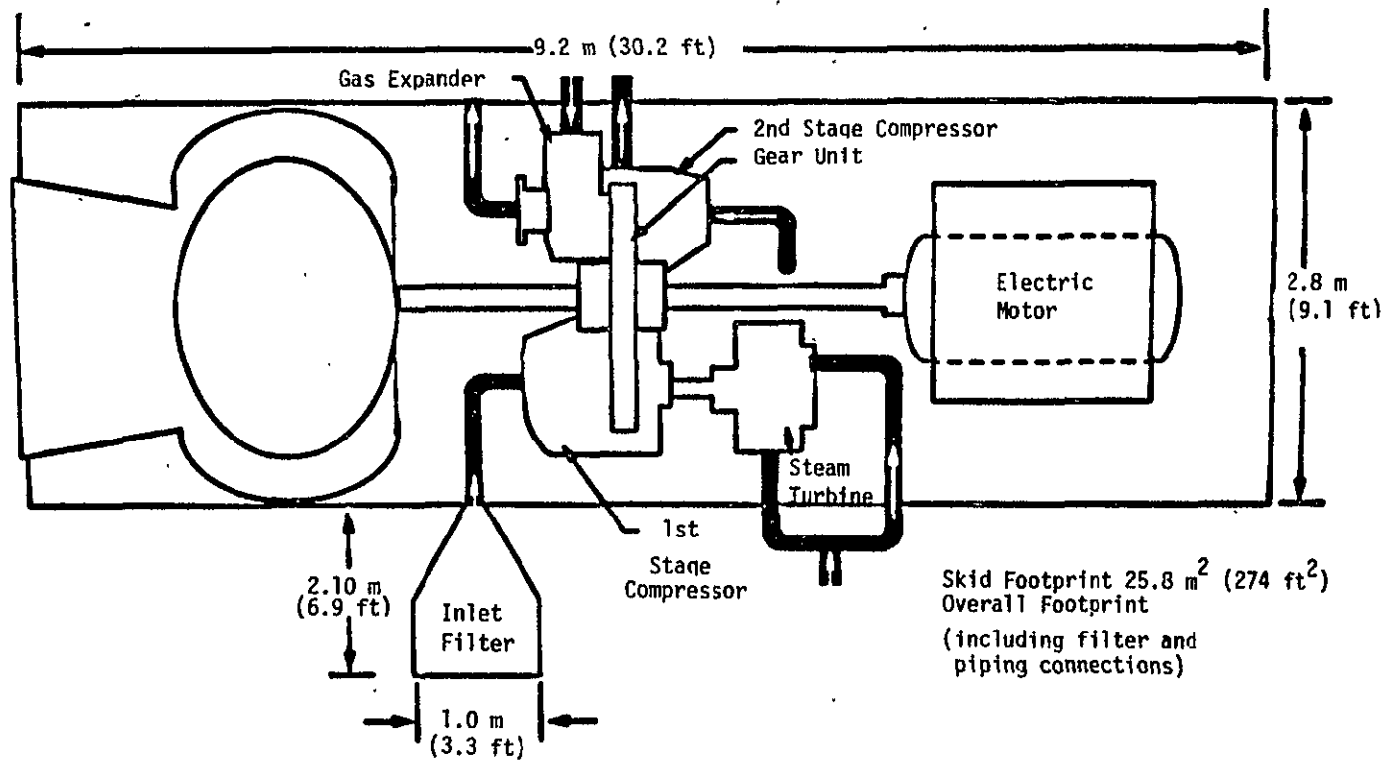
Rotating Equipment System Arrangement (Top View)
